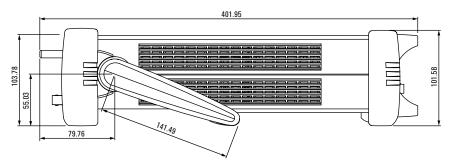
Dimensions (side view, with handle and bumper, in millimeters, nominal)
